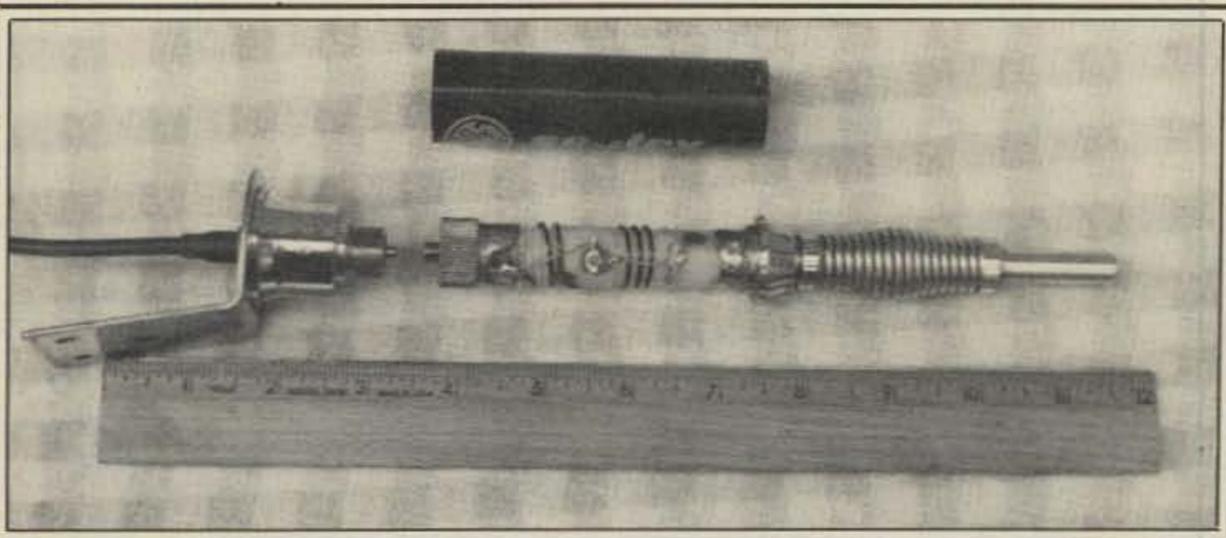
Mechanical dimensions and modifications of the whip base assembly for the 2 meter conversion.
